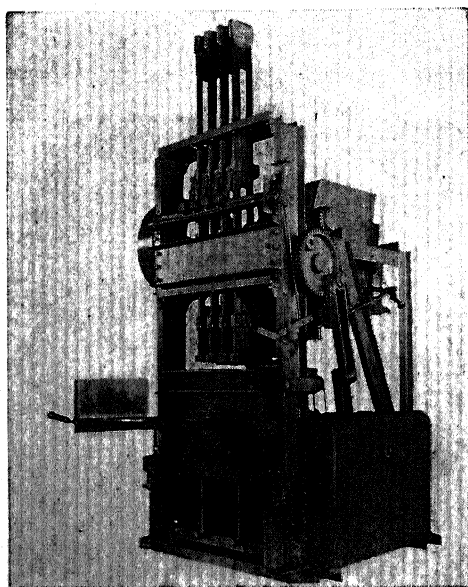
Power stripper used for forming concrete blocks. Shows interesting details of welded steel construction. Hard-facing with super abrasion resisting electrode, also employed on parts subject to abrasion and impact (on edges of tamps).
